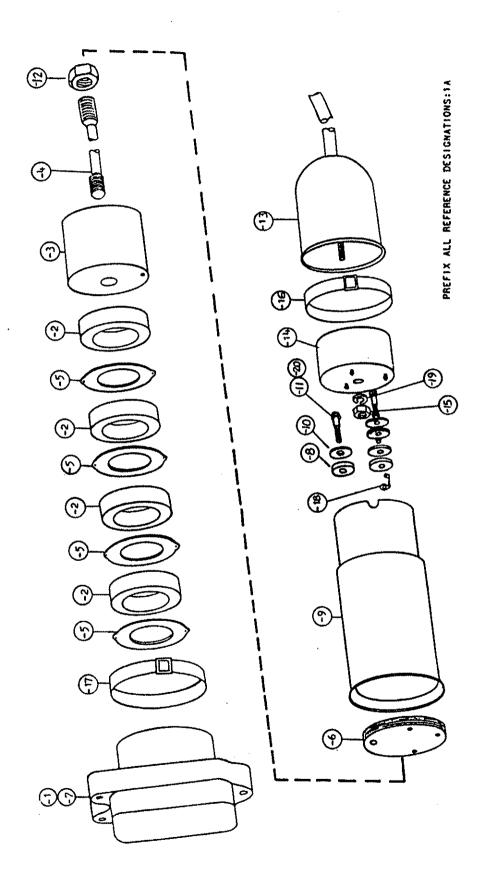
Transducer Assembly, Cutaway View TR5014 and TR5014A
